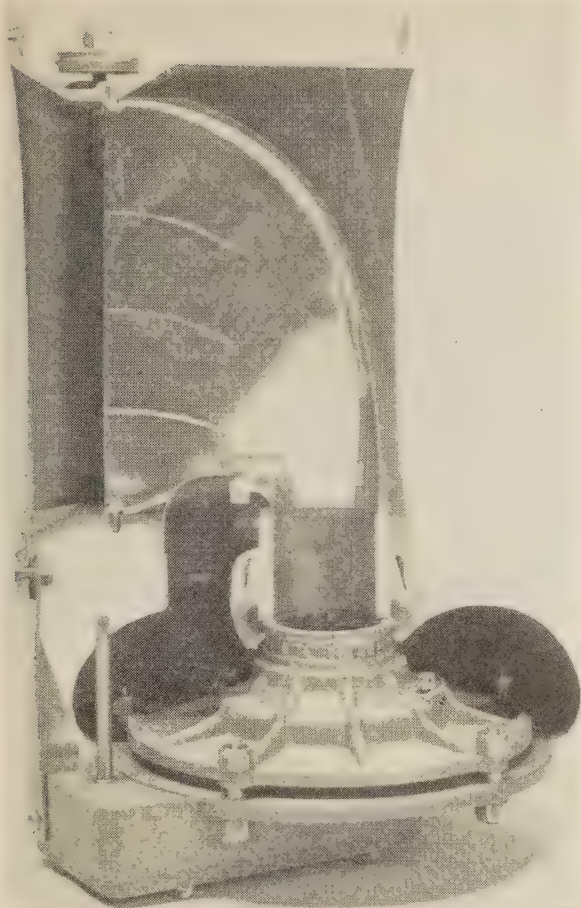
PARTIAL CUTAWAY VIEW OF TEMP-TURB ASSEMBLY OF FIG. 2
